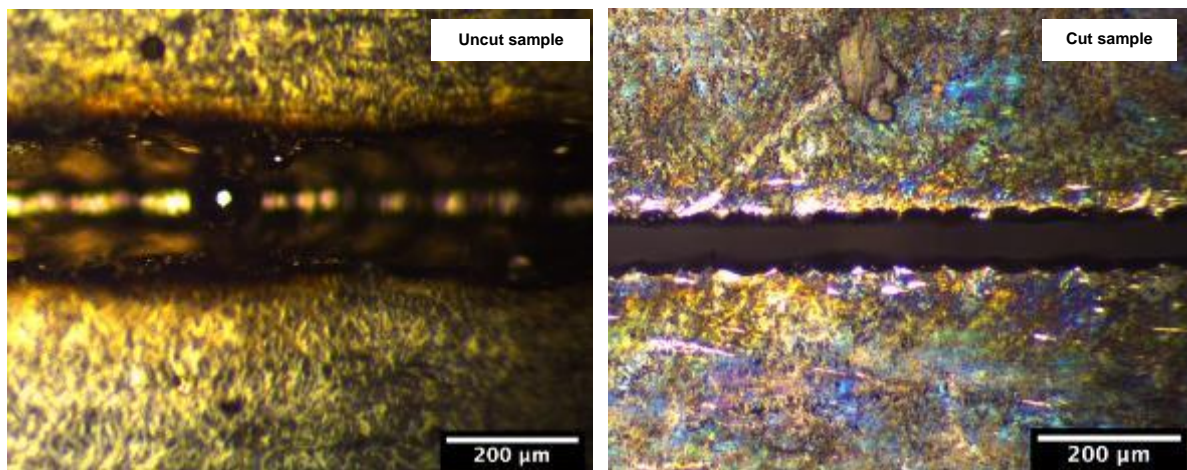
Kerf pictures on U-Mo with uncut (left) & cut parts (right)
